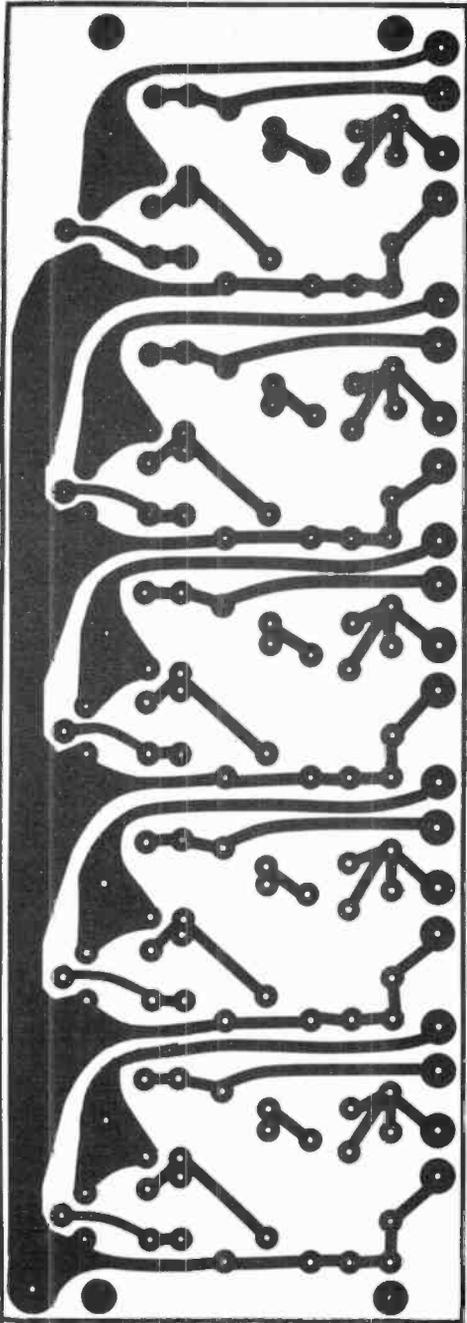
Actual-size illustration of printed circuit board. For hole drill sizes, refer to Fig. 4.
